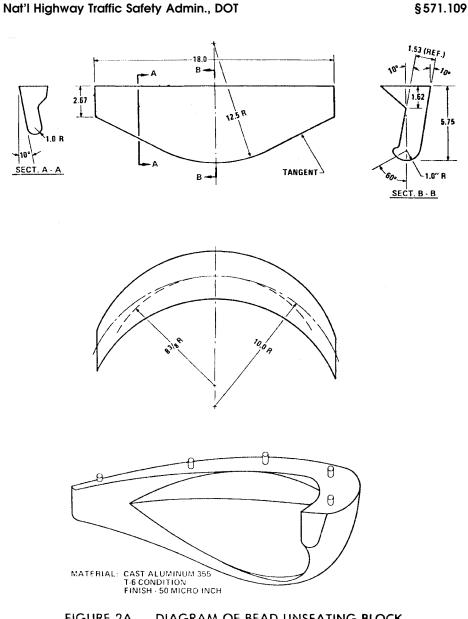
A — DIAGRAM OF BEAD UNSEATING BLOCK DIMENSIONS IN INCHES
